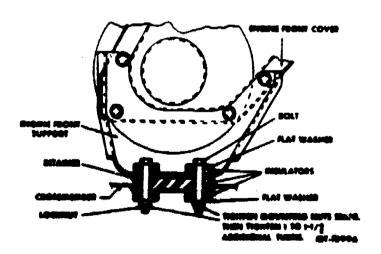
Engine Front Mounting With 5-Piece Insulator(Light Duty Trucks).
